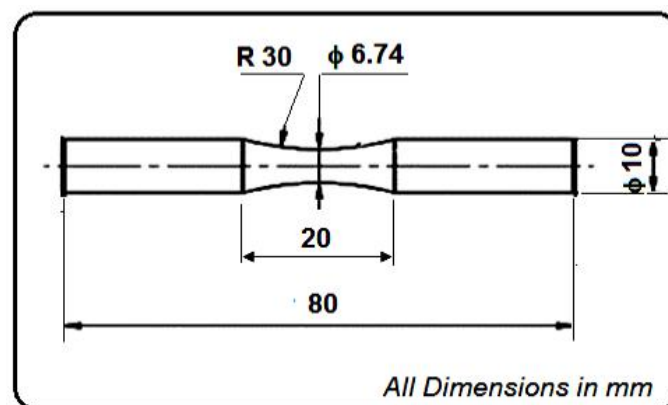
Standard Fatigue Specimen Geometry According to DIN 50113
